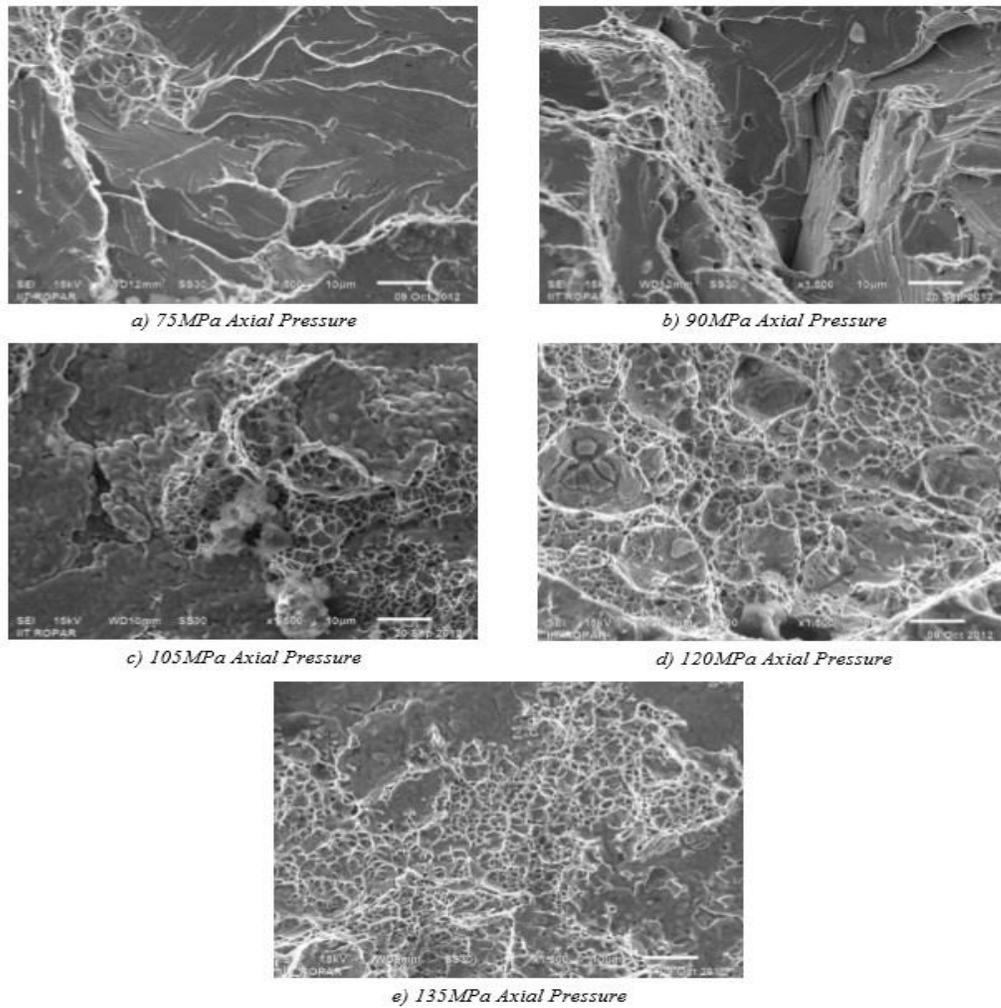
SEM micrograph taken at the fractured surfaces during tensile testing of the friction welded specimen welded at 1000 rpm and at different axial pressures
